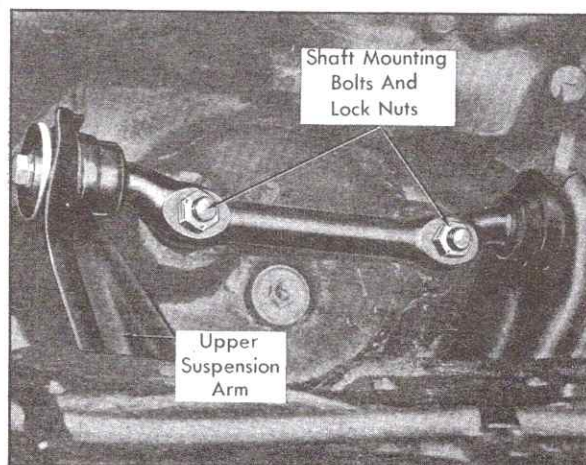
Upper Arm and Shaft Assembly Installed
